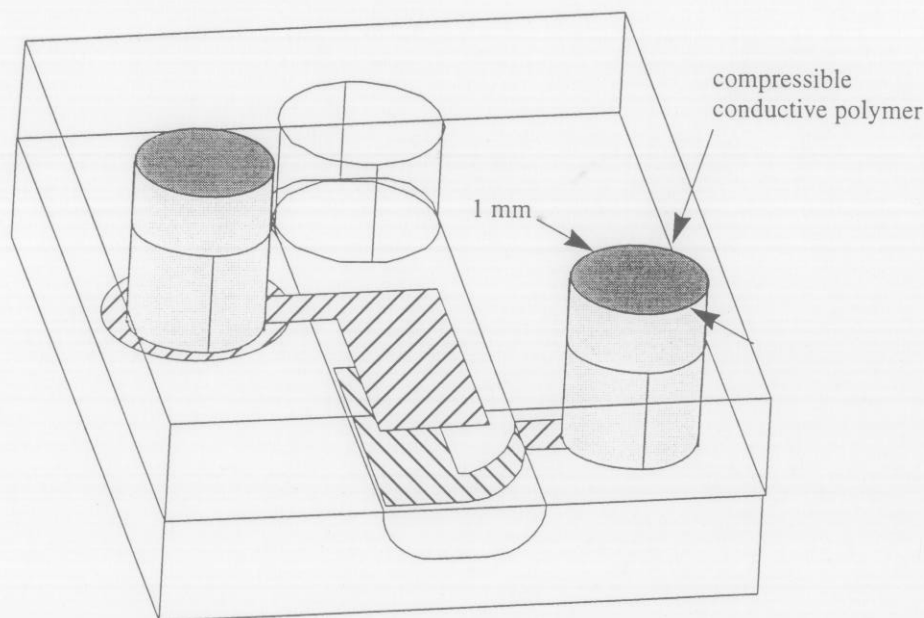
Section of a fluidic chip (bonded version of Fig. 1), showing compressible conductive polymer pillars which are inserted into holes for making contact to the electrodes.
